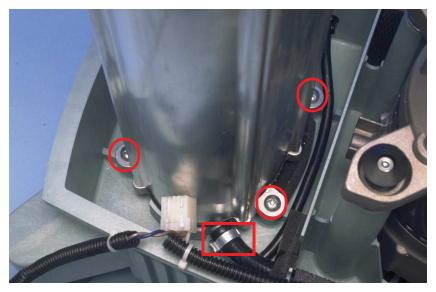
FIGURE AN: LOCATION OF THE ONE-EARED CLAMP AND MOUNTING SCREWS (3 OF 4 SHOWN)
